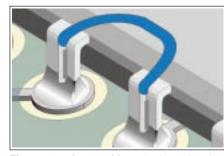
Acceptable* Wire looped and soldered to adjacent component leads.
